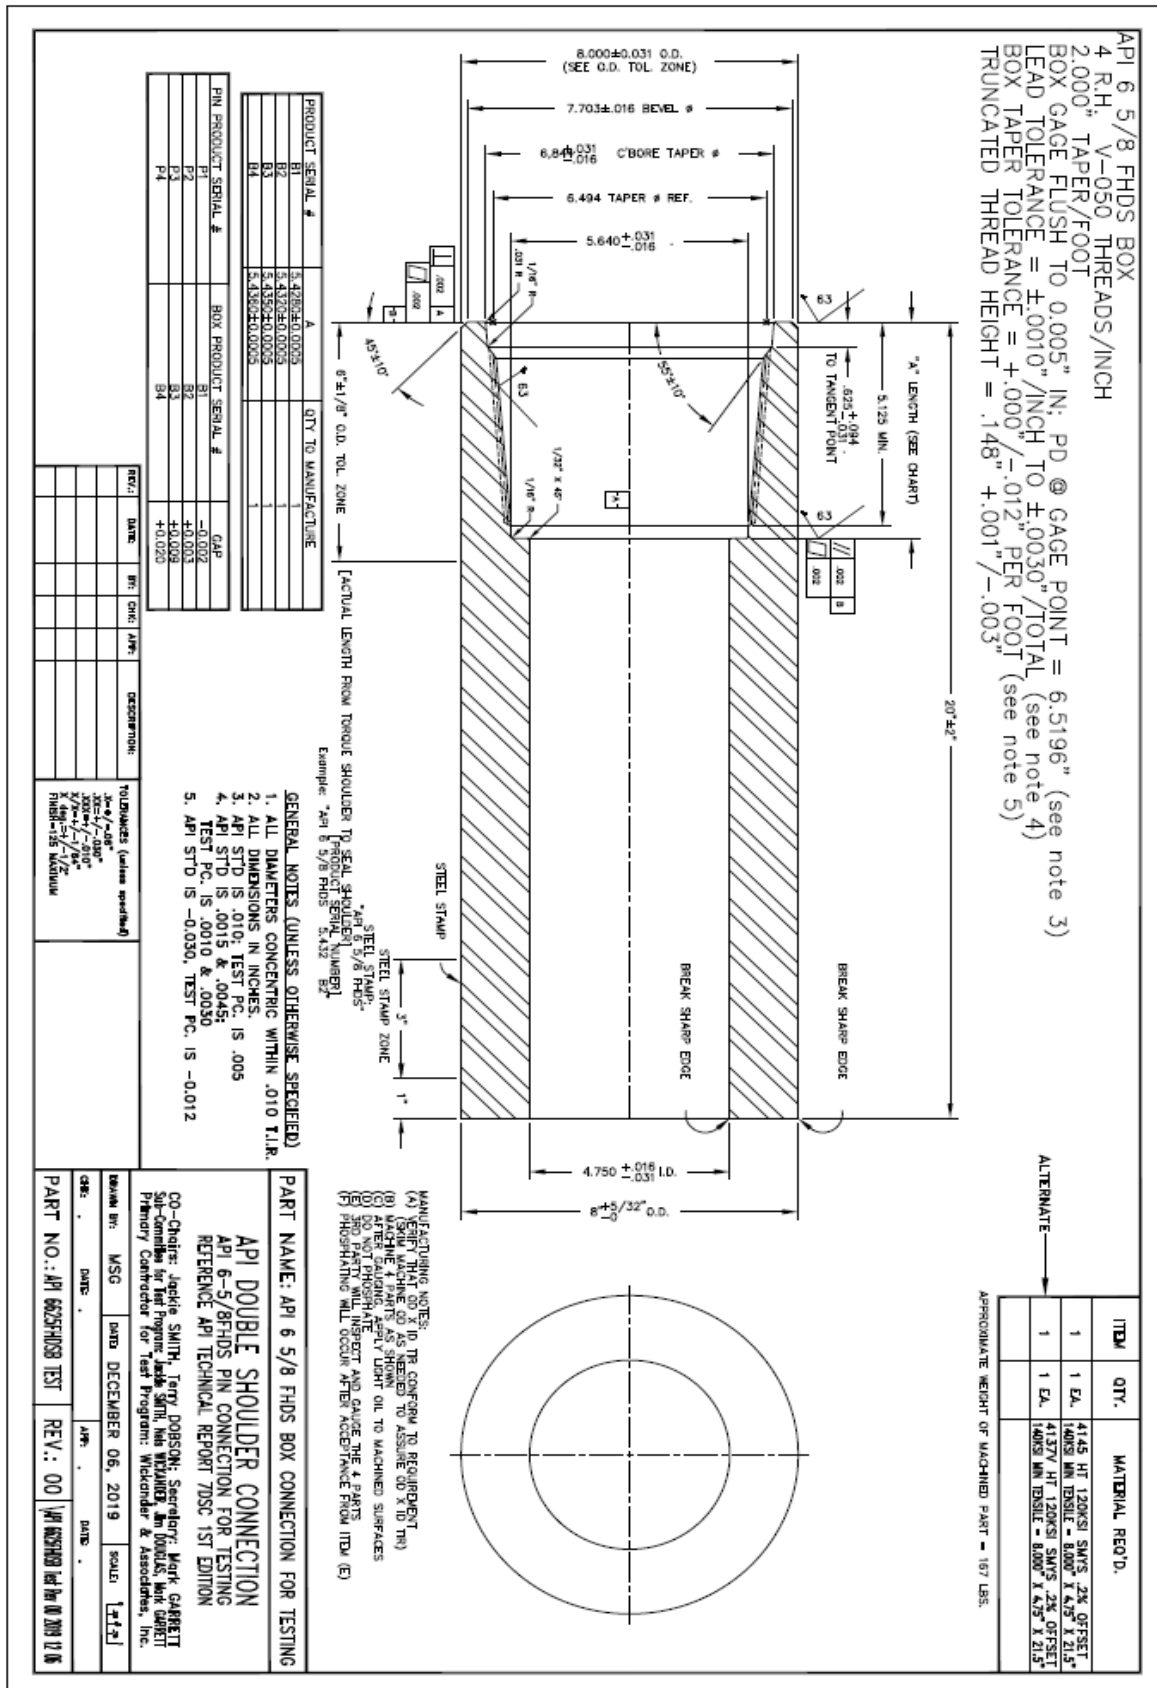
6 5/8 FHDS Box Drawing Used in Tests
